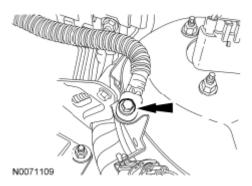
Locating Positive Battery Cable Nut Courtesy of FORD MOTOR CO.
